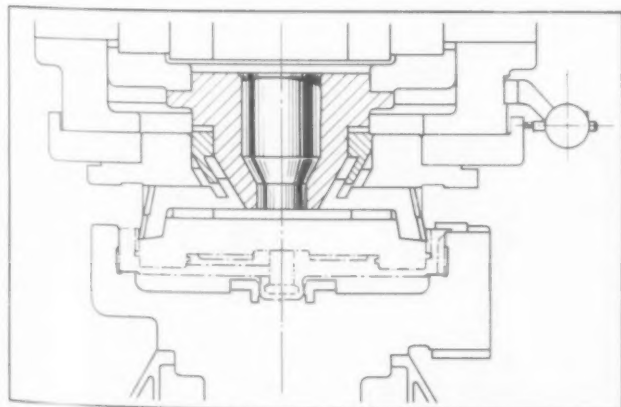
As shown here, the action of the feed cone and the retractor cone is reversed in cutting internal gears. Feed cones back up the work during the cut, then retractor cone moves upward to move tools away from the gear, preventing drag while gear returns to starting position.
